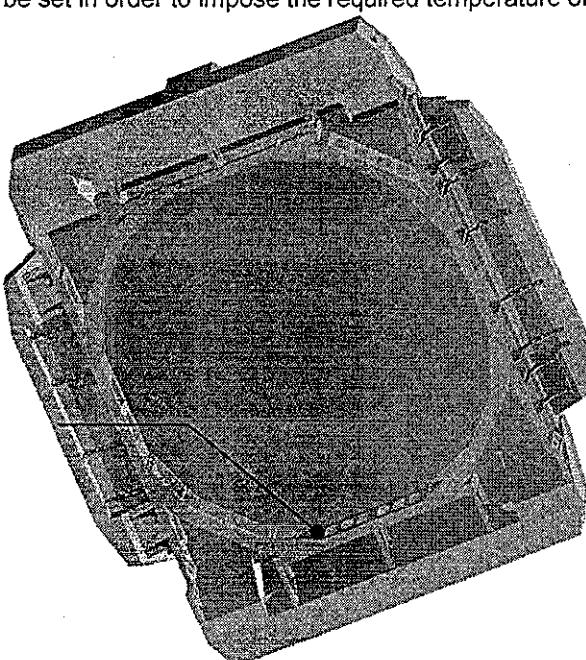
TOF assembly, with the honeycomb panel (blue)
